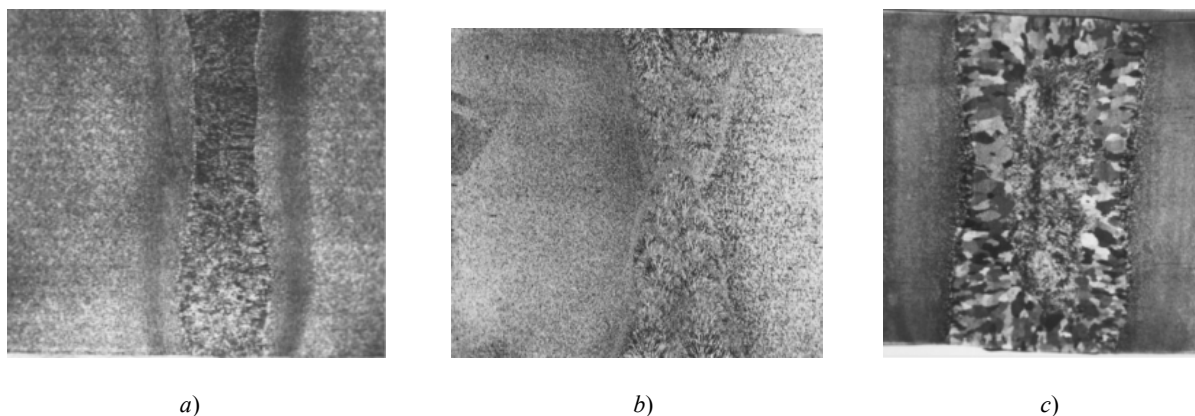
Macrostructure of weld joint made by the following method:
